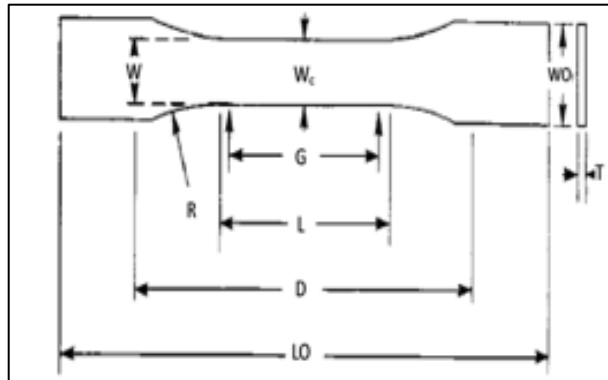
Standard Tensile Test Specimen with (T=3, LO=165, W=W<sub>c</sub>=12.5, WO=20, D=75, L=65, G=60 and R = 75 all dimensions in mm) for plane specimen [ASTMD-638-I]
